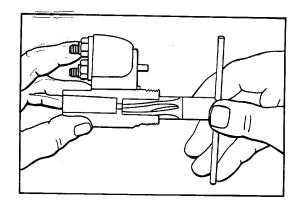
Cleaning Injector Body Ring with Tool J 21089
